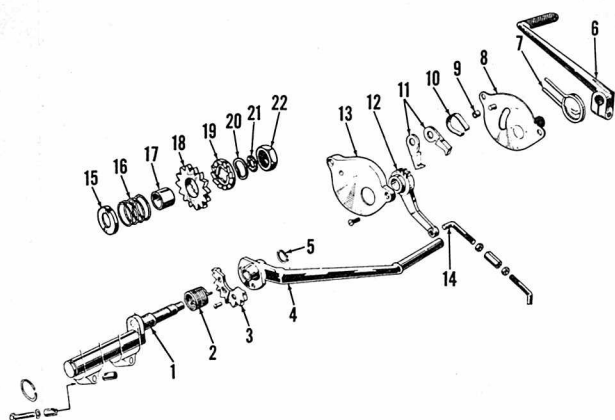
Exploded view of the kick starter and foot operated gear shift linkage.
